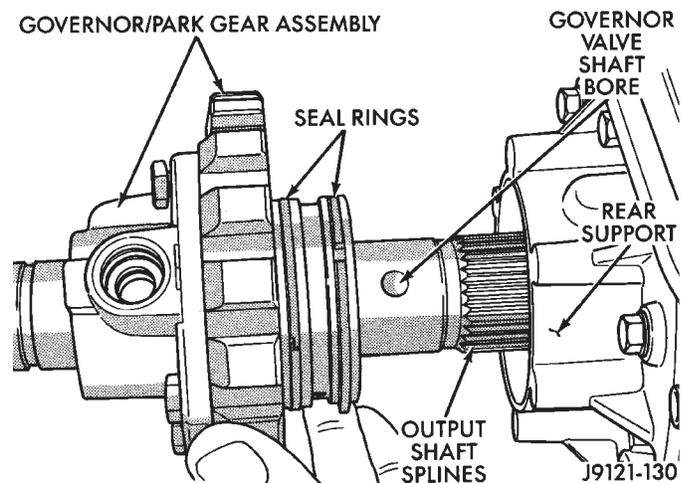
Installing Governor Body And Park Gear in valve and in output shaft. If valve shaft binds, governor/park gear is misaligned.
